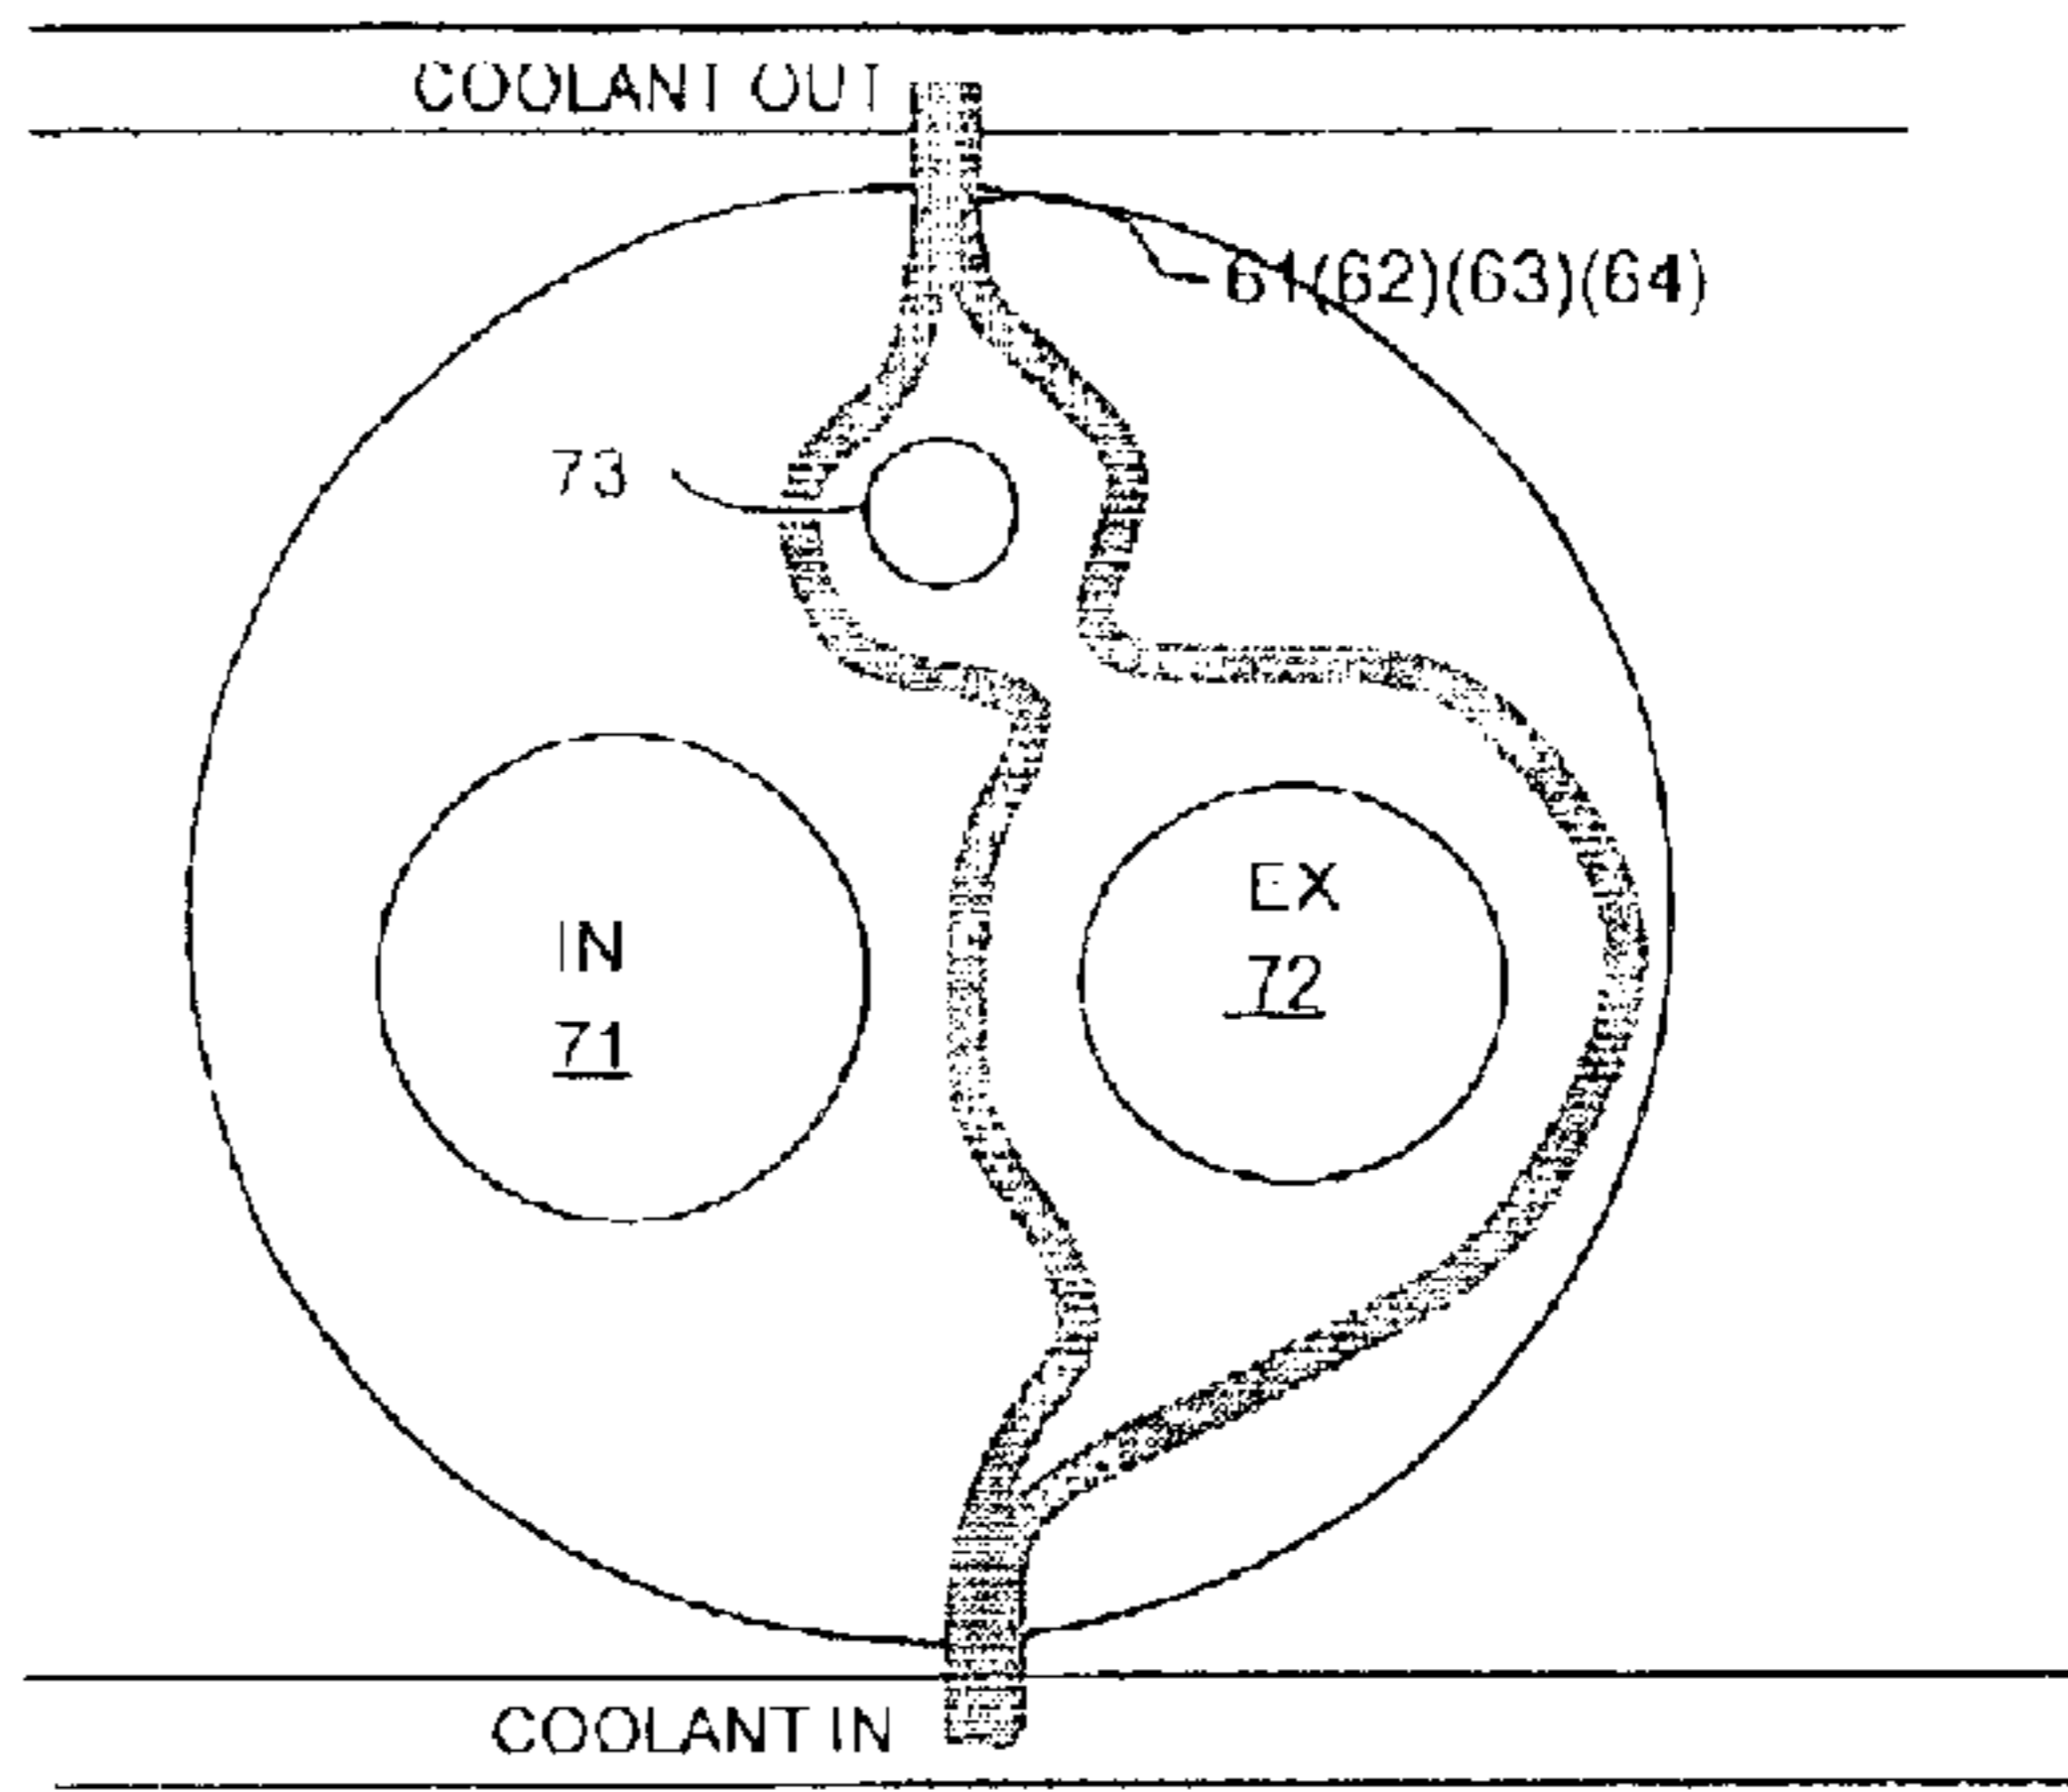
Cooling the Valve Bridge and the Spark Plug
